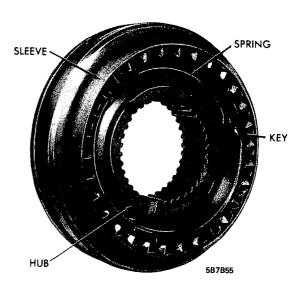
B-55 - 3rd and 4th Synchronizer Assembly
